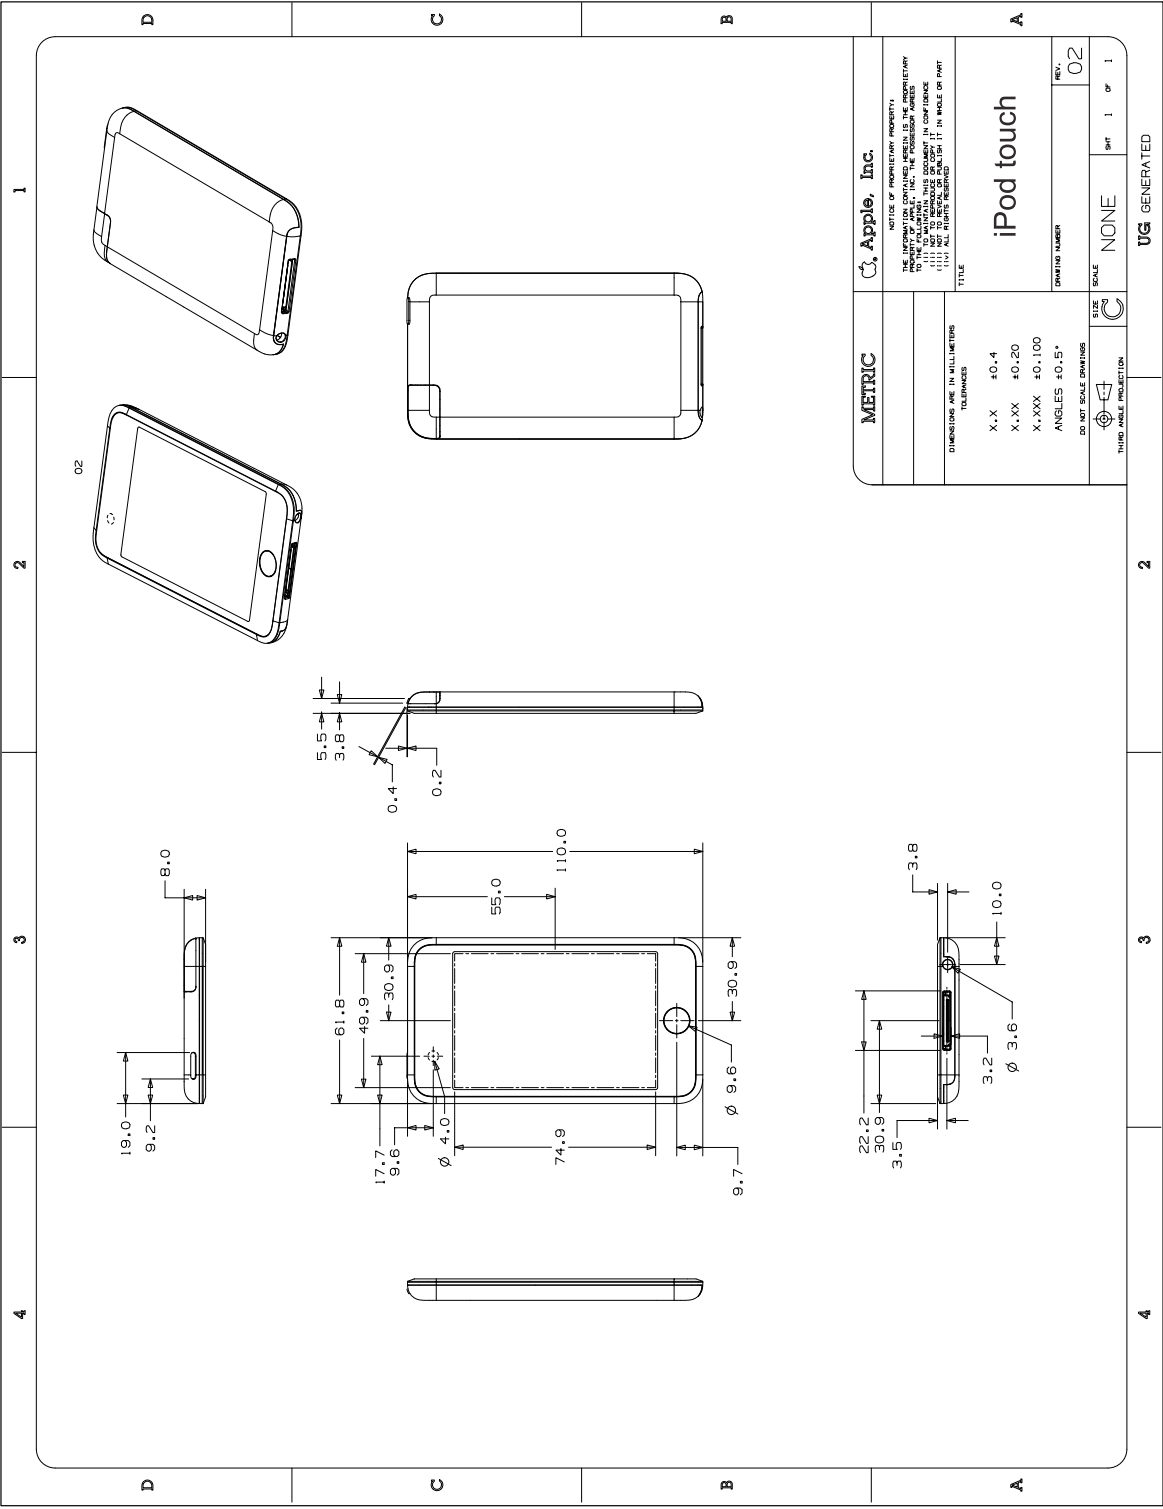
iPod touch 2nd gen. 8GB, 16GB, 32GB Dimensional Drawing
